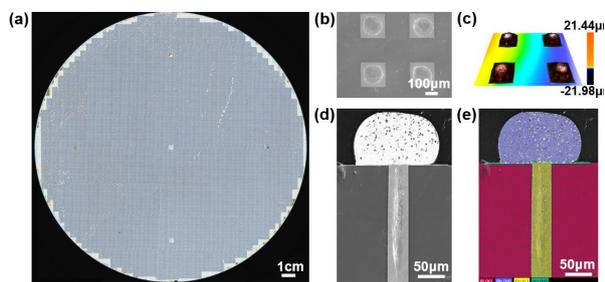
(a) The optical image of TSV connected solder ball arrays on an 8-inch wafer; (b) SEM image of the solder ball array; (c) 3D confocal image of the solder ball
